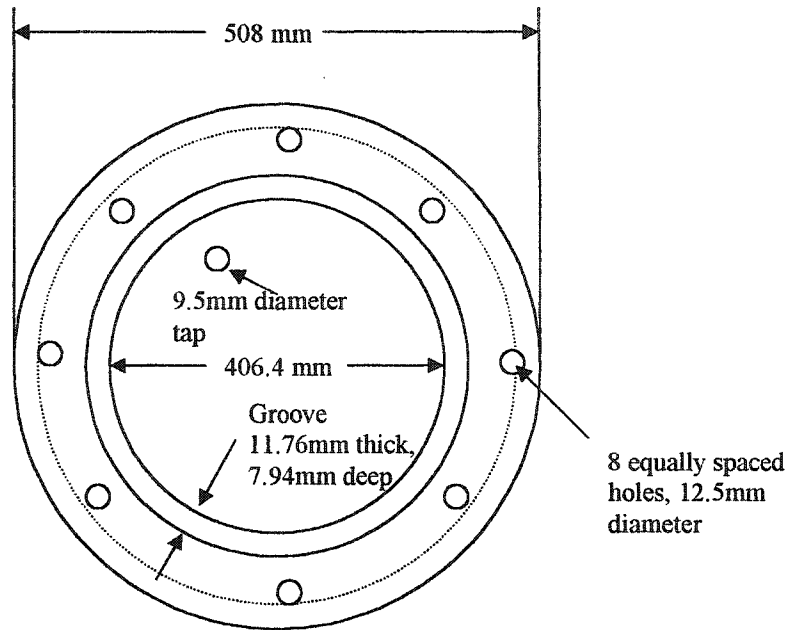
Dimensions of end caps (4) and groove. 9.5mm diameter hole tapped for air fittings appeared only on top caps. Sample vessel bottom cap had a similar hole in the center (for the drain) and sample vessel top cap had a large hole (diameter = 0.038m) in the center (for the piston rod).
